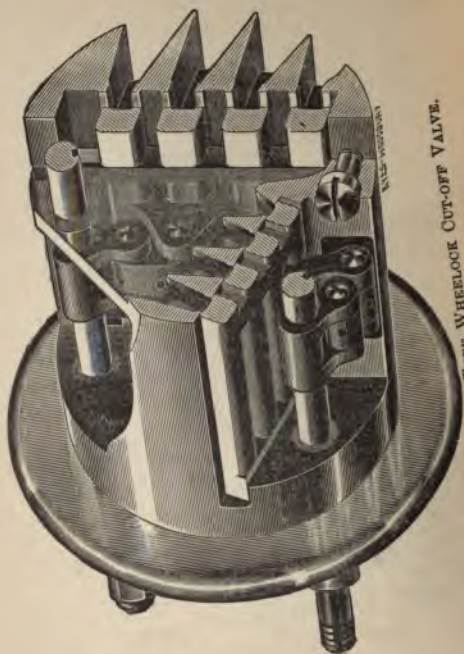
NEW TYPE WHEELOCK CUT-OFF VALVE.
